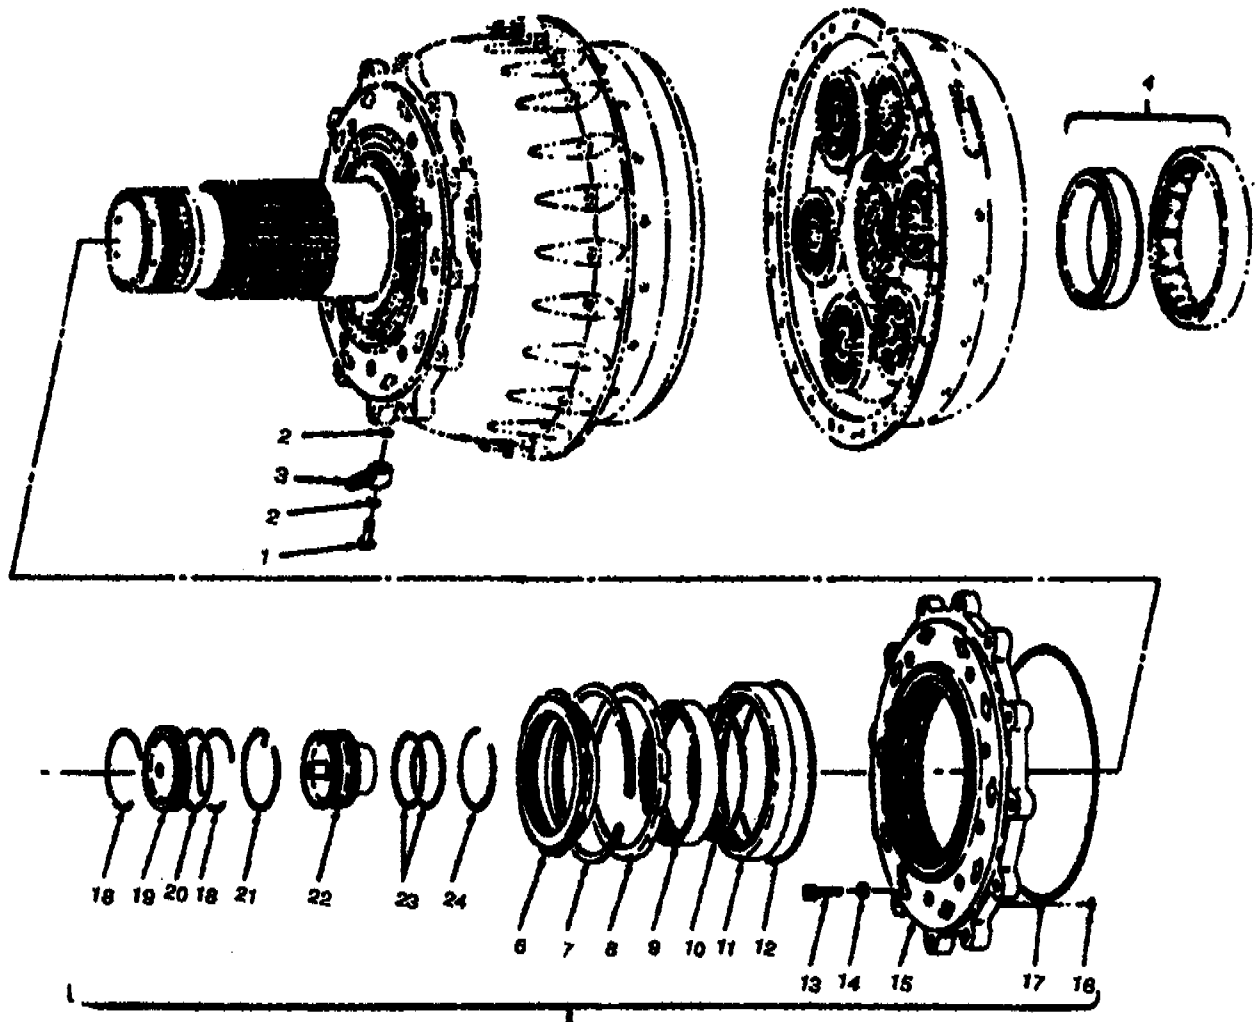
Primary Reduction Gear Assembly (T53-L-701, -701A) (Sheet 1 of 2).
